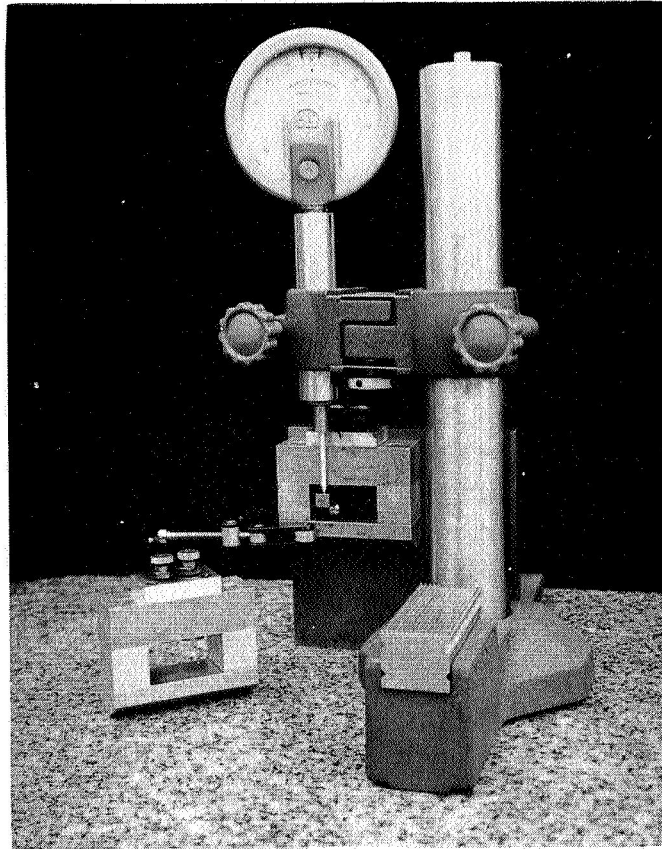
Inspection procedure for checking the parallelism of surfaces "A" and "B" of the couple shoe sweating fixture.
